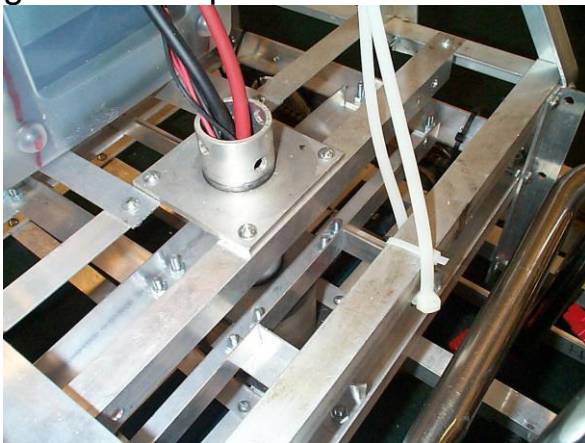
Don't side load motors. Make sure you support motor shafts on both ends with bearing surfaces.
